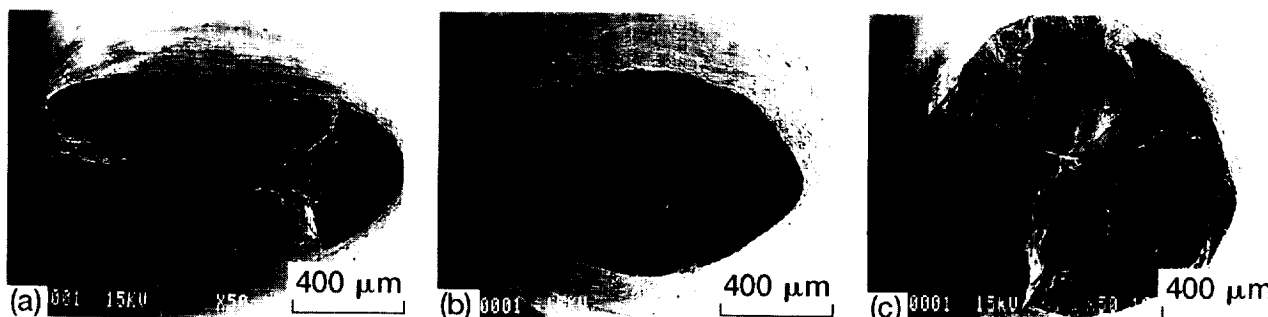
Macroscopic view showing geometry of the fracture surfaces (a,b) elliptical for A-11 and C-5, respectively, and (c) circular for B-17.
